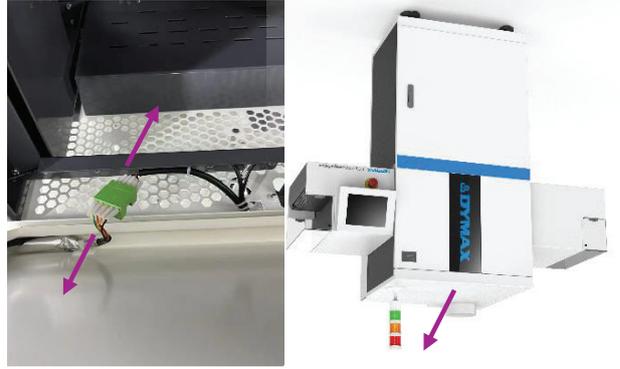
Lift the Front of the Upper Cover; Unplug the Connector; Remove the Upper Cover
